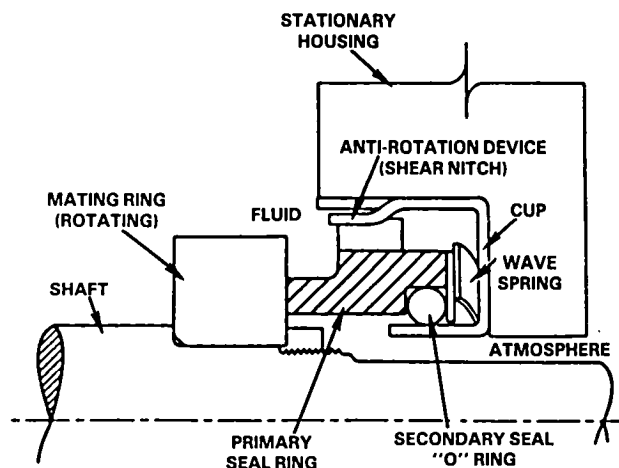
Accessory Gearbox Face Seals Provide Convenient Package or Cartridge Type Construction
